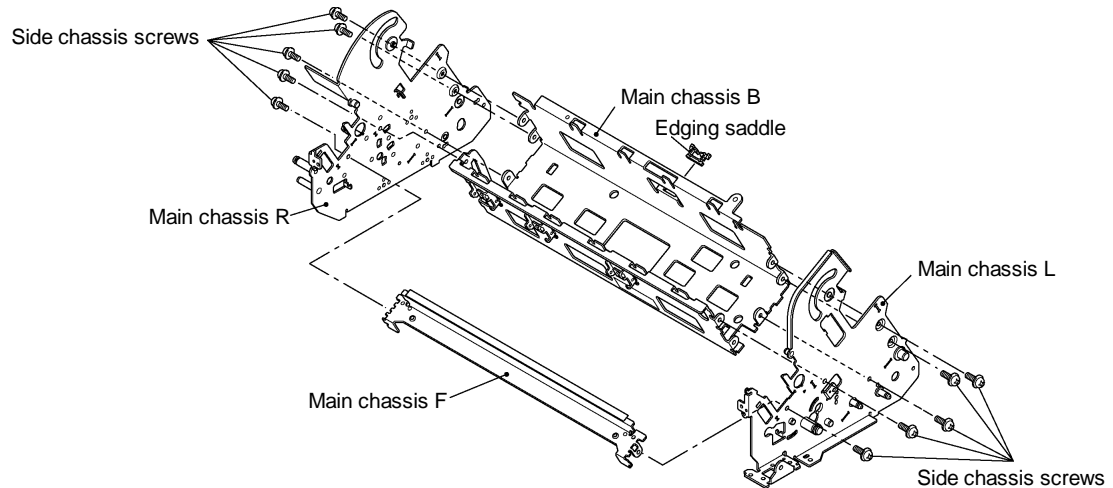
Installing the Main Chassis L, R, and F
